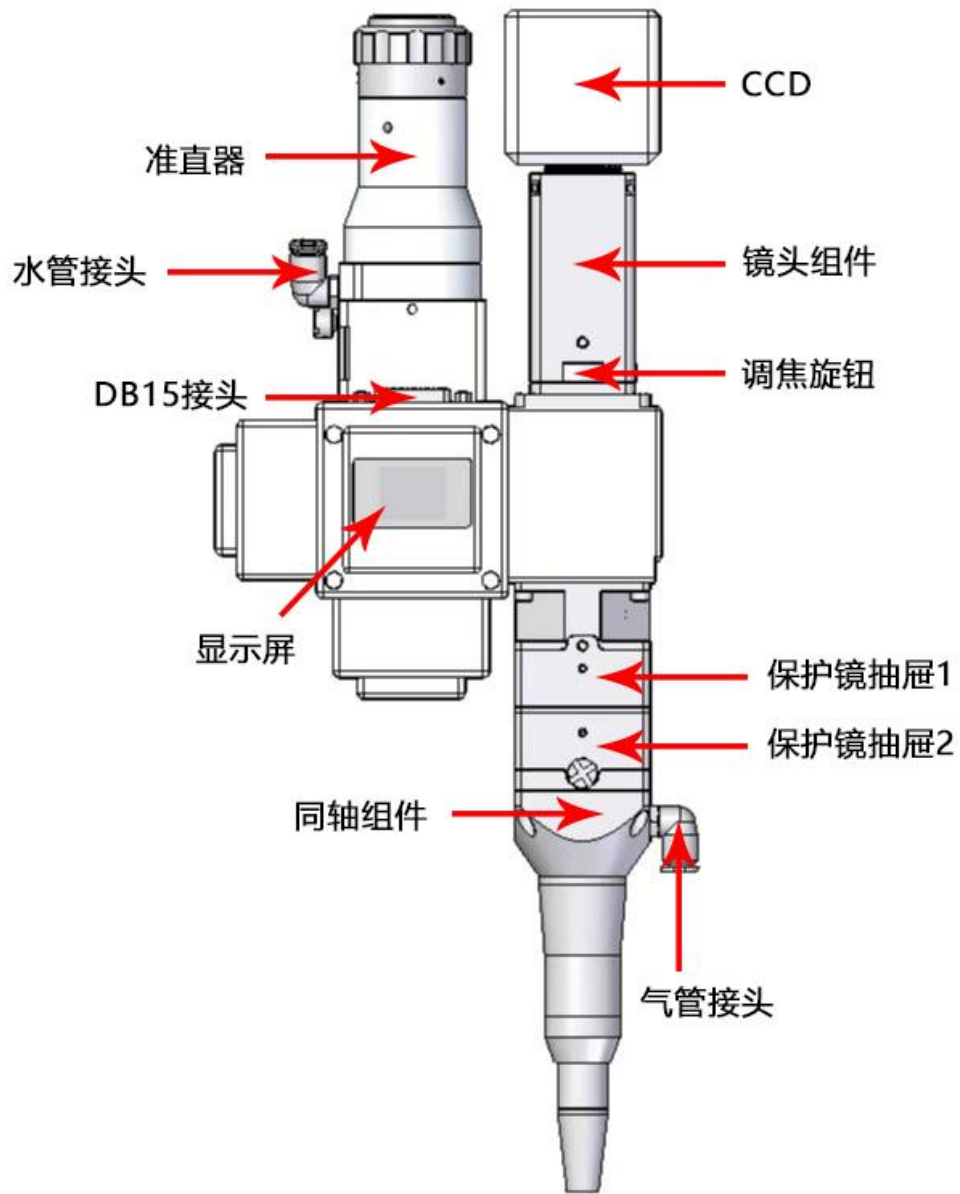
Schematic diagram of double pendulum light industrial welding head structure
